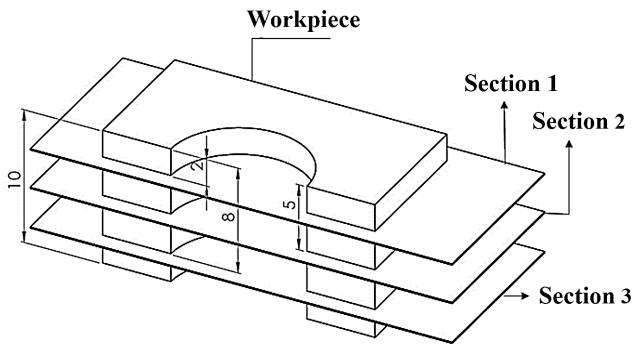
Sections of the workpiece where the geometrical and dimensional tolerances were measured
